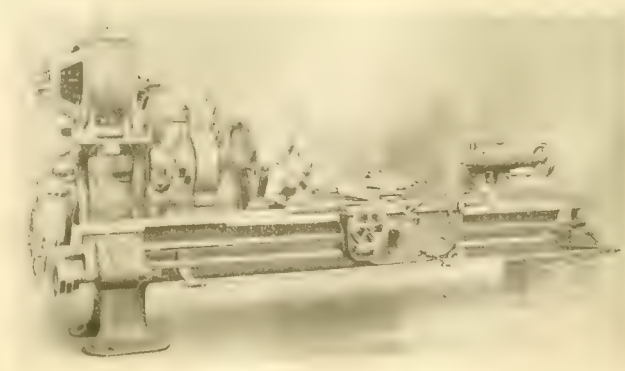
MOTOR-DRIVEN ENGINE LATHE
